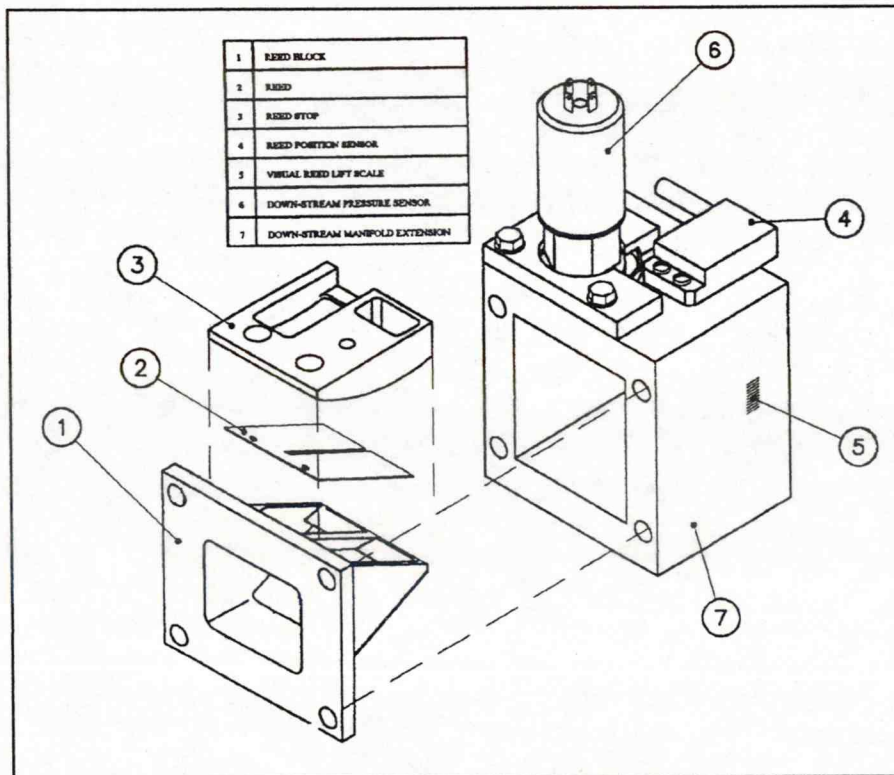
Exploded assembly of the transparent reed manifold and the associated component parts of the reed valve and sensor.
